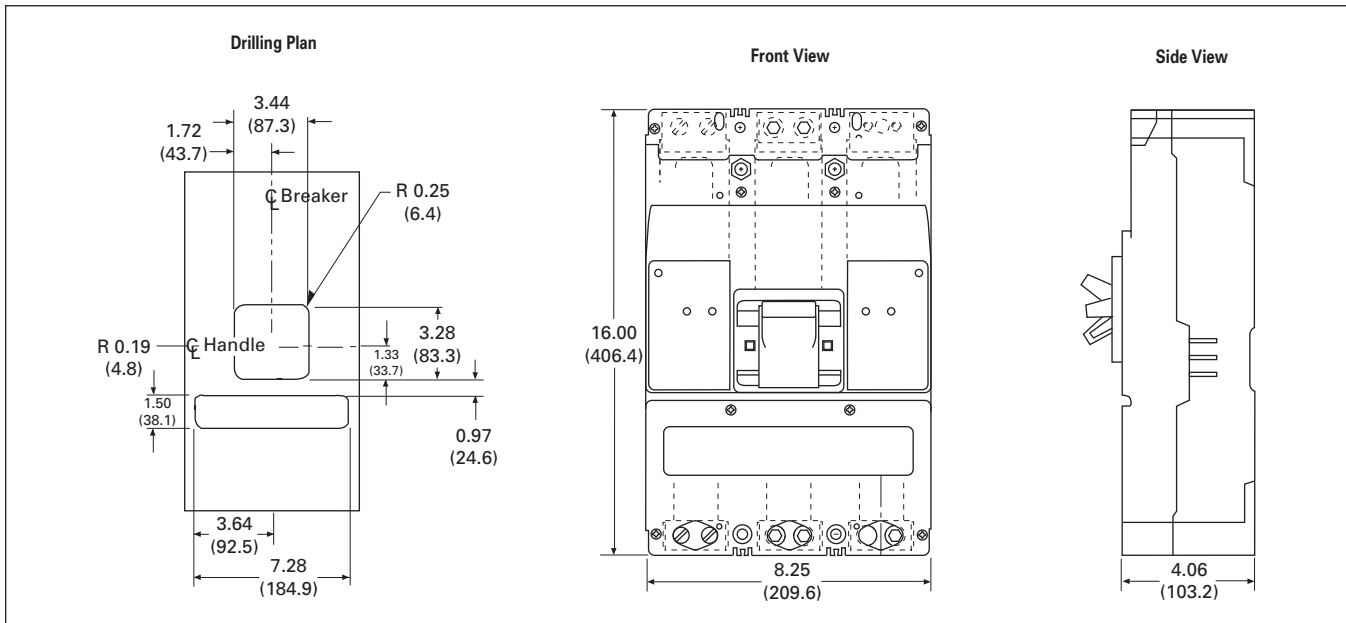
MDL-Frame, 2- and 3-Pole — Dimensions in Inches (mm)
